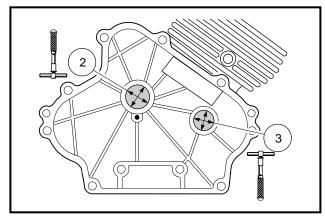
Inspect Bearing Surfaces in Crankcase
